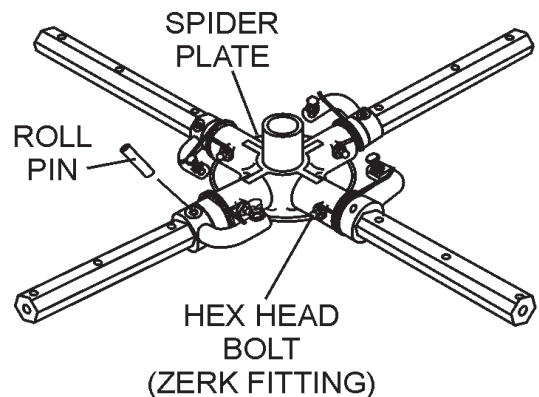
Removing Roll Pin and Zerk Grease Fitting
